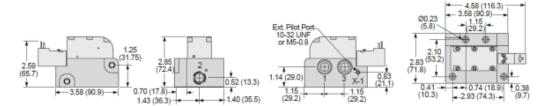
10500-3520-MC31 3520 C multiplexer valve accessory - dimensions in inches [mm]
